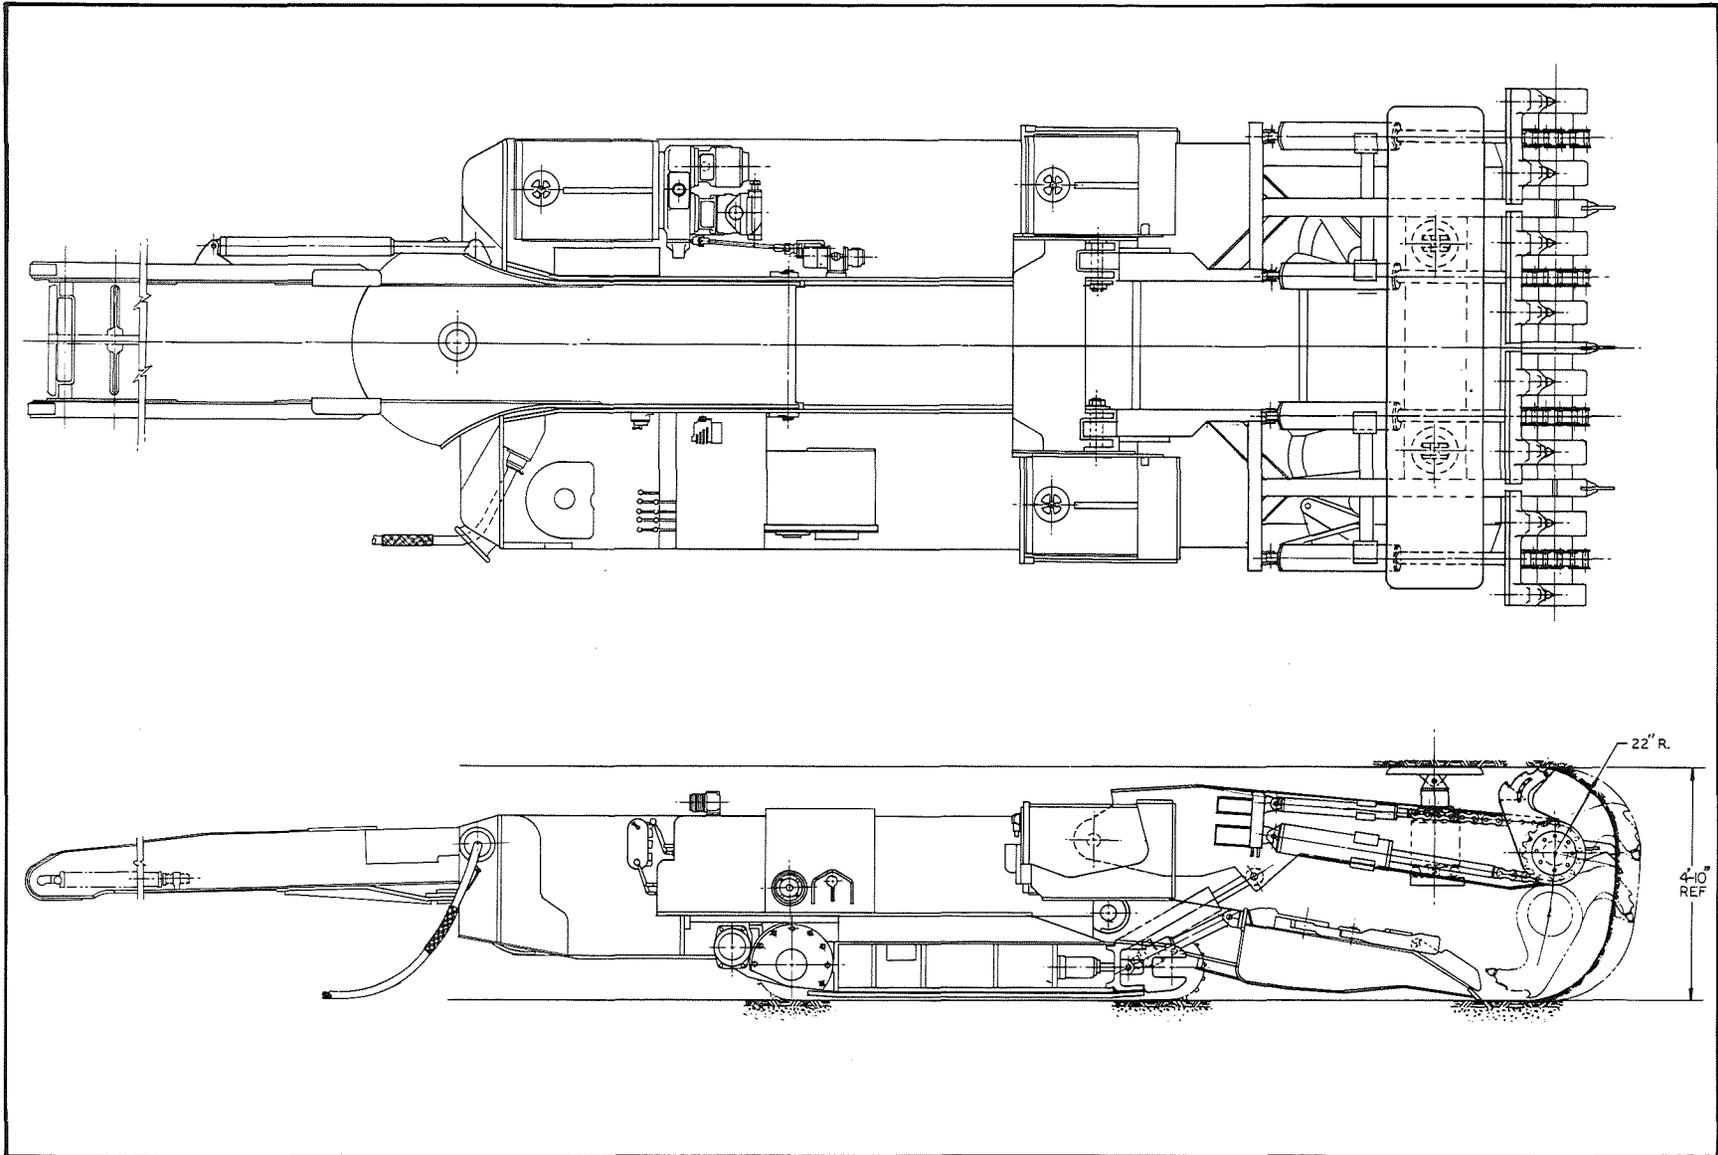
LAYOUT DRAWING, SELF-SUMPING HEAD CONCEPT
